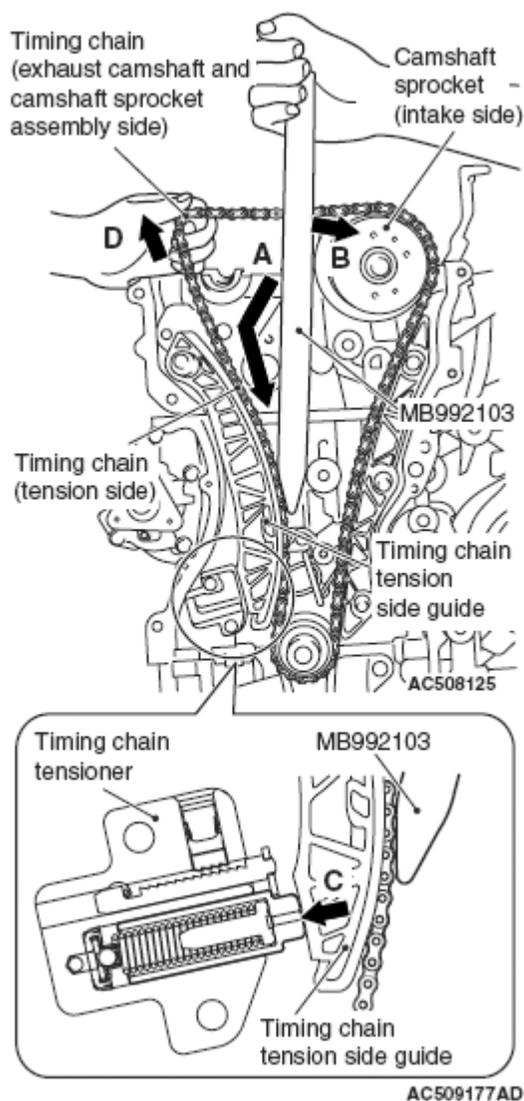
Pulling Camshaft And Camshaft Sprocket Assembly (Exhaust Side)
